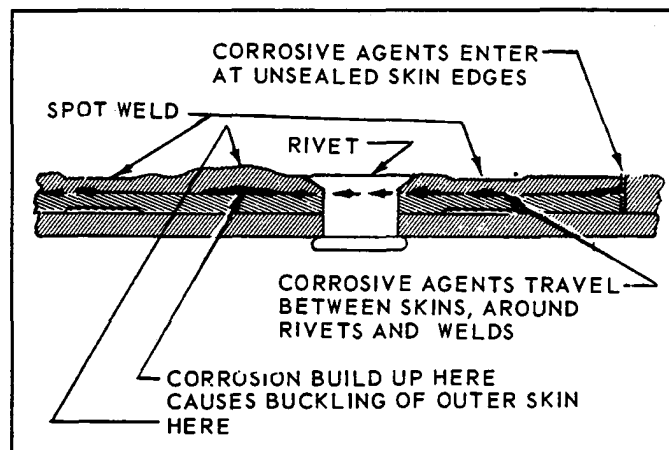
SPOTWELDED SKIN CORROSION
